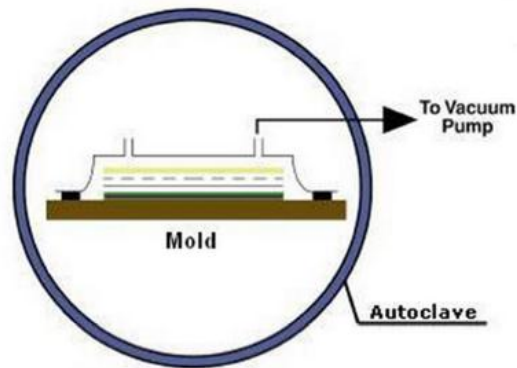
Schematic of samples position in mold for autoclave type vacuum press mold. (Source [2])
